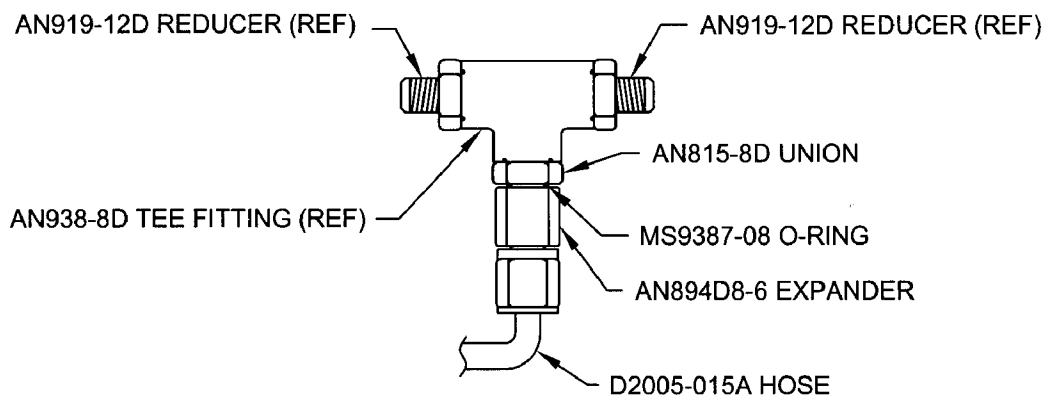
D206-570-049 VALVE ASSEMBLY
